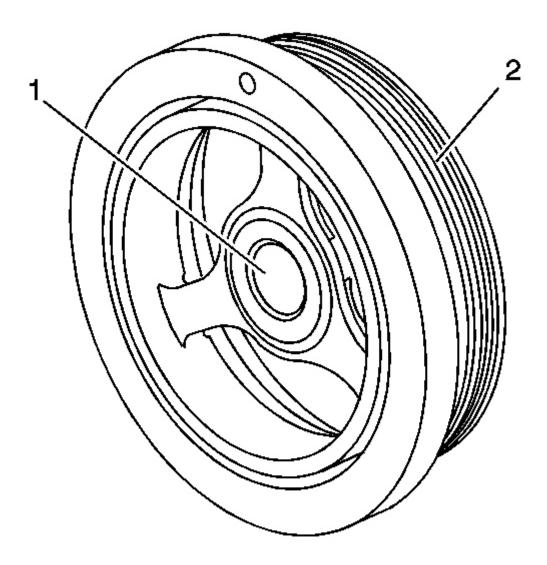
View Of Crankshaft Balancer Sealing Area & Belt Ribs Courtesy of GENERAL MOTORS CORP.
